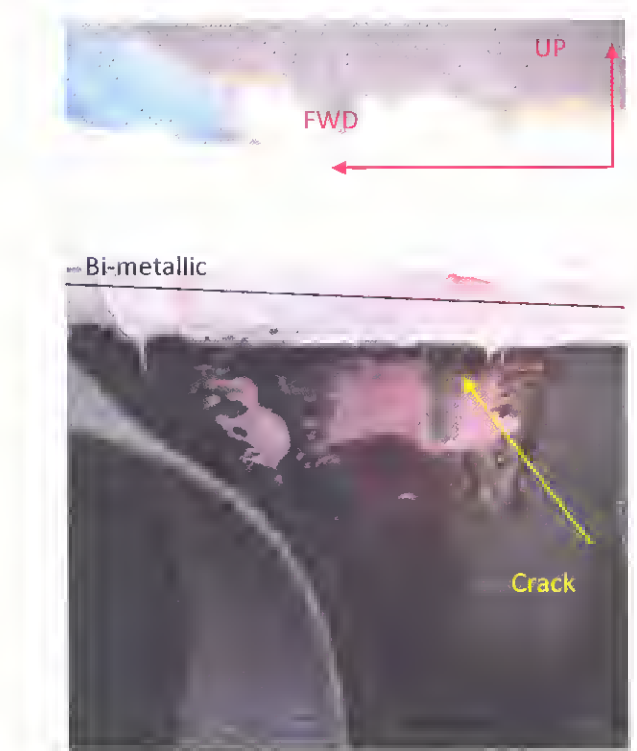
Frame 57, Main Deck, Port, Outboard view of shell plating
